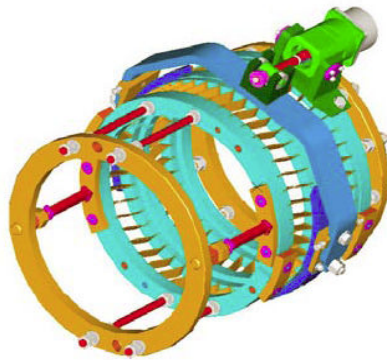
Detailed 3D-drawing of a blade tuner frame with piezo-assisted tuner.
